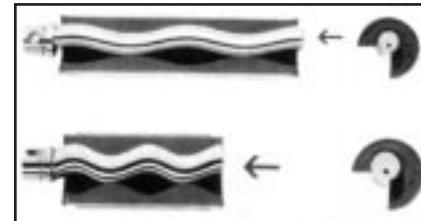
Conventional (top) and long (bottom) geometry single helix rotor and double helix stator designs
